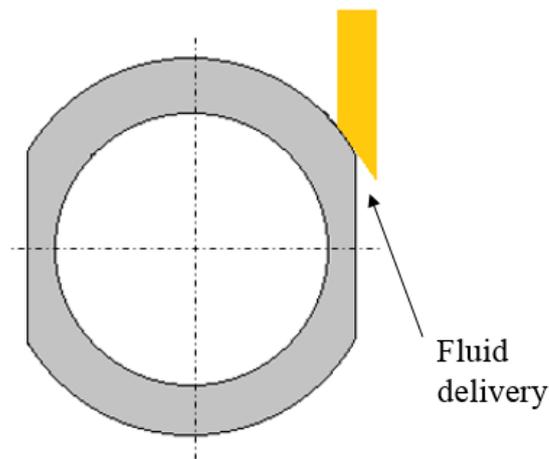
An illustration of a single segment over the bearing side and how the fluid is delivered to contact zone.
